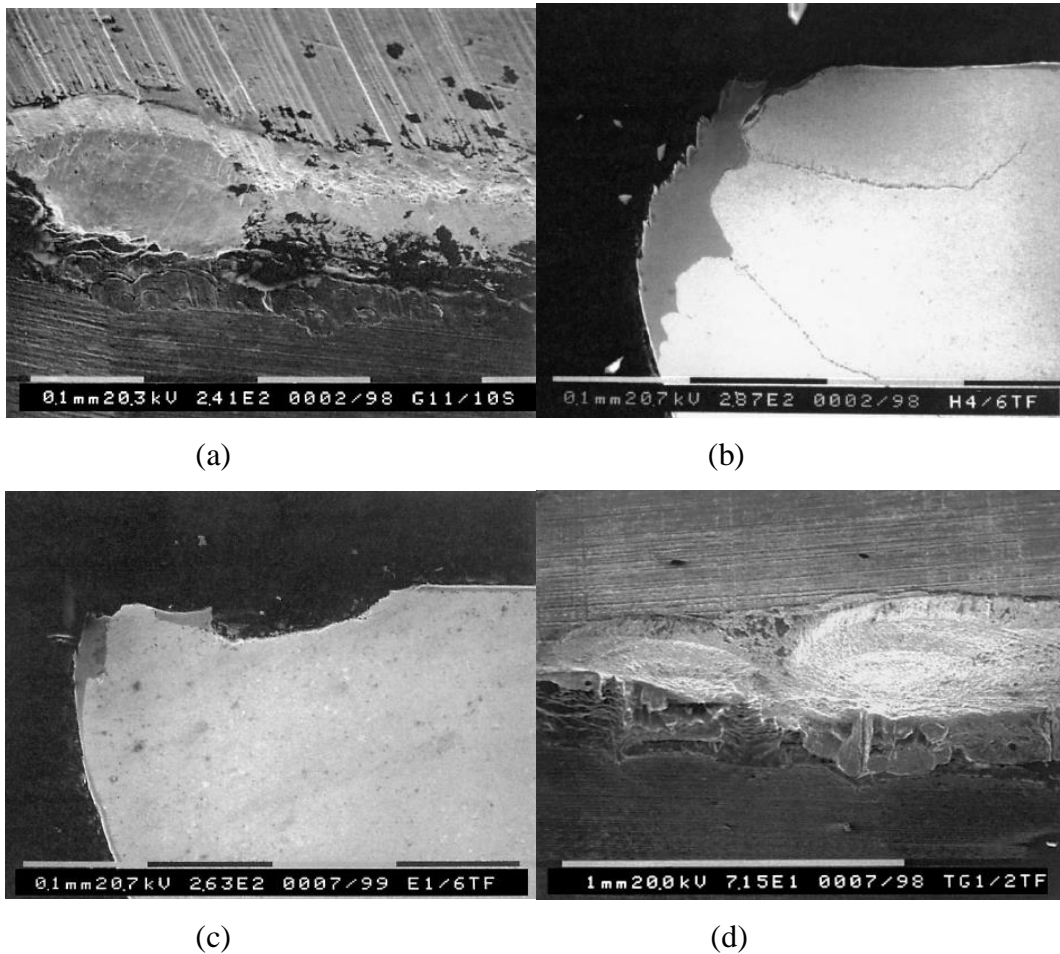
The different tool wears: (a) delamination; (b) plastic deformation; (c) Adhesion of workpiece material; (d) cracks and severe flaking [52].
